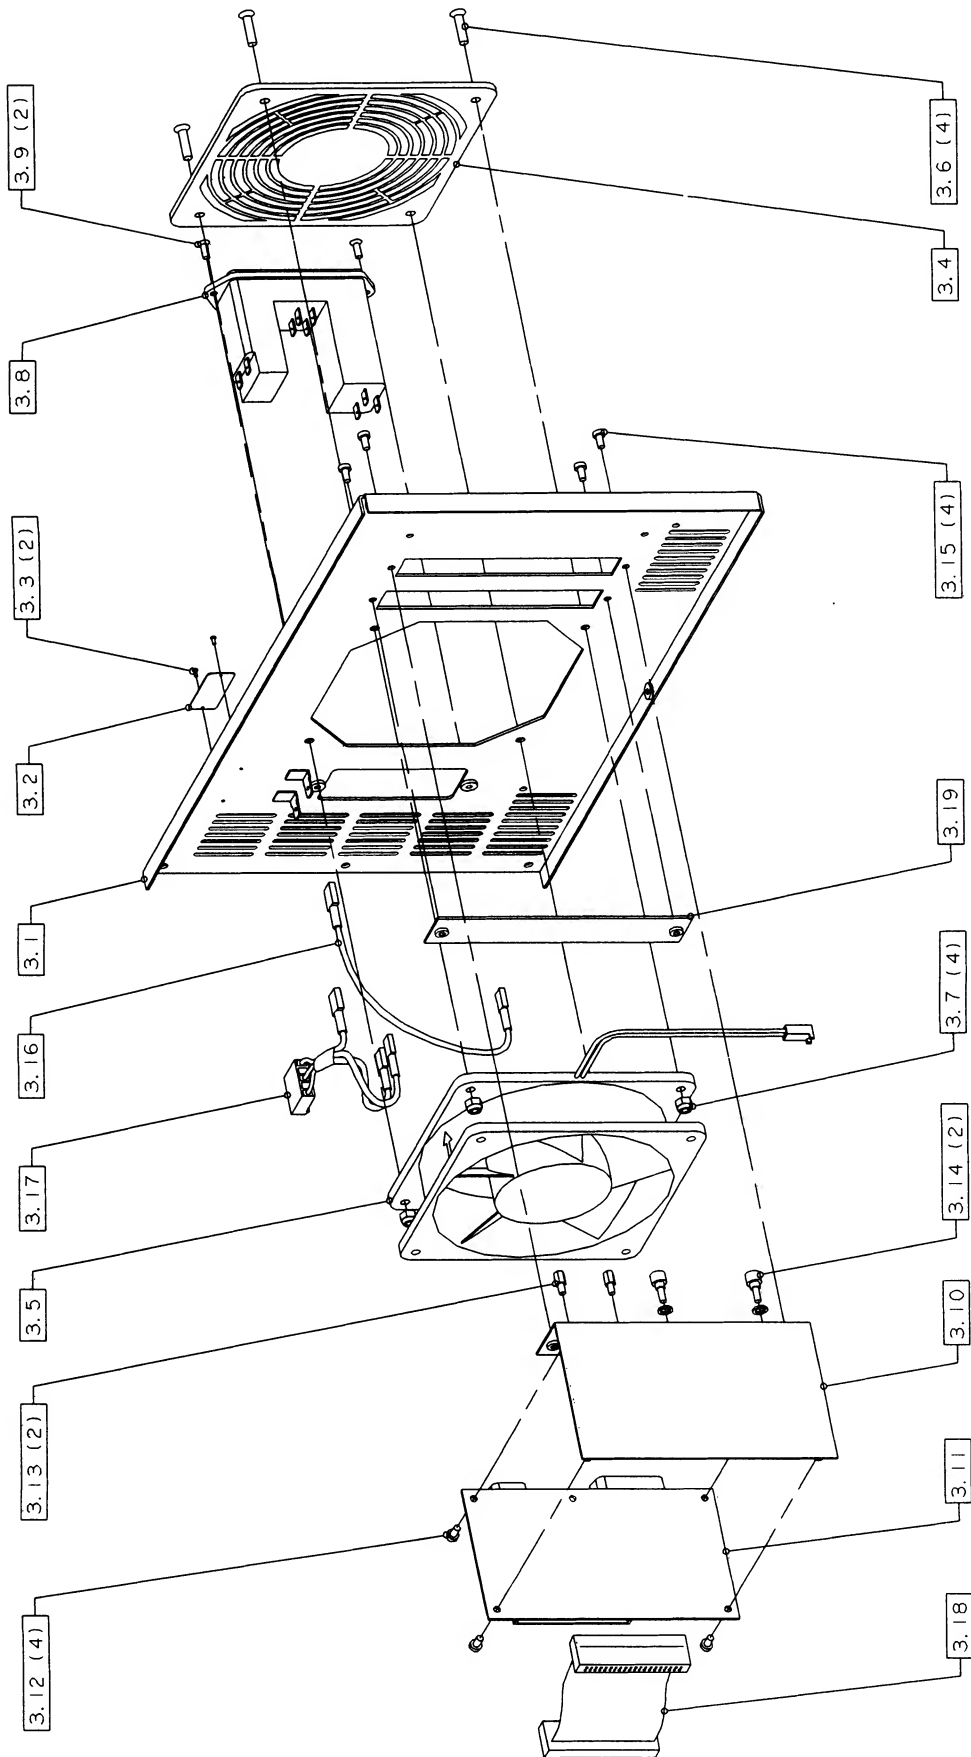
9320 REAR PANEL EXPLODED VIEW
